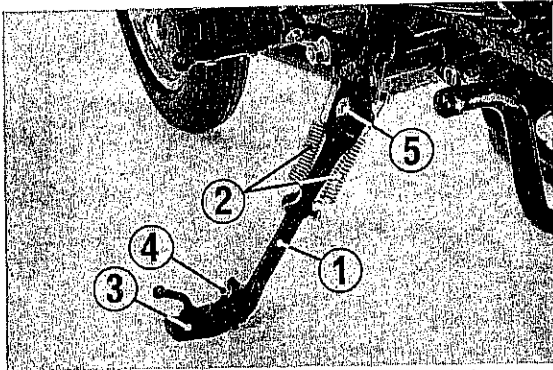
① Side stand bar ④ 6 mm bolt
